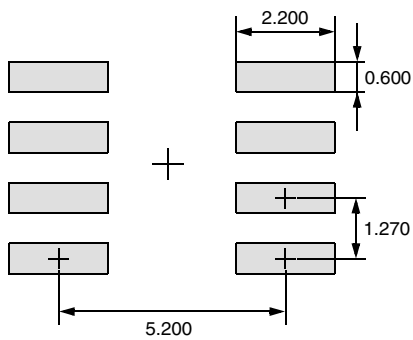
Pad size recommendation for SOIC8 Package (all dimensions in mm)
